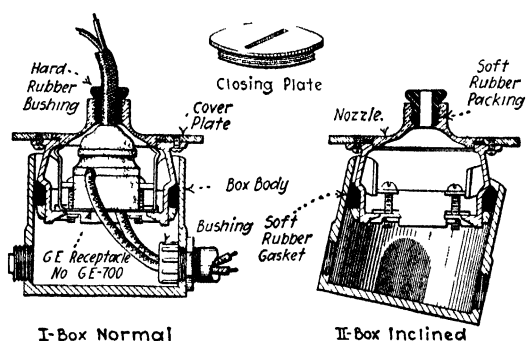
Watertight adjustable floor outlet fitting No. 6650 made by the Sprague Electric Works, New York City.
